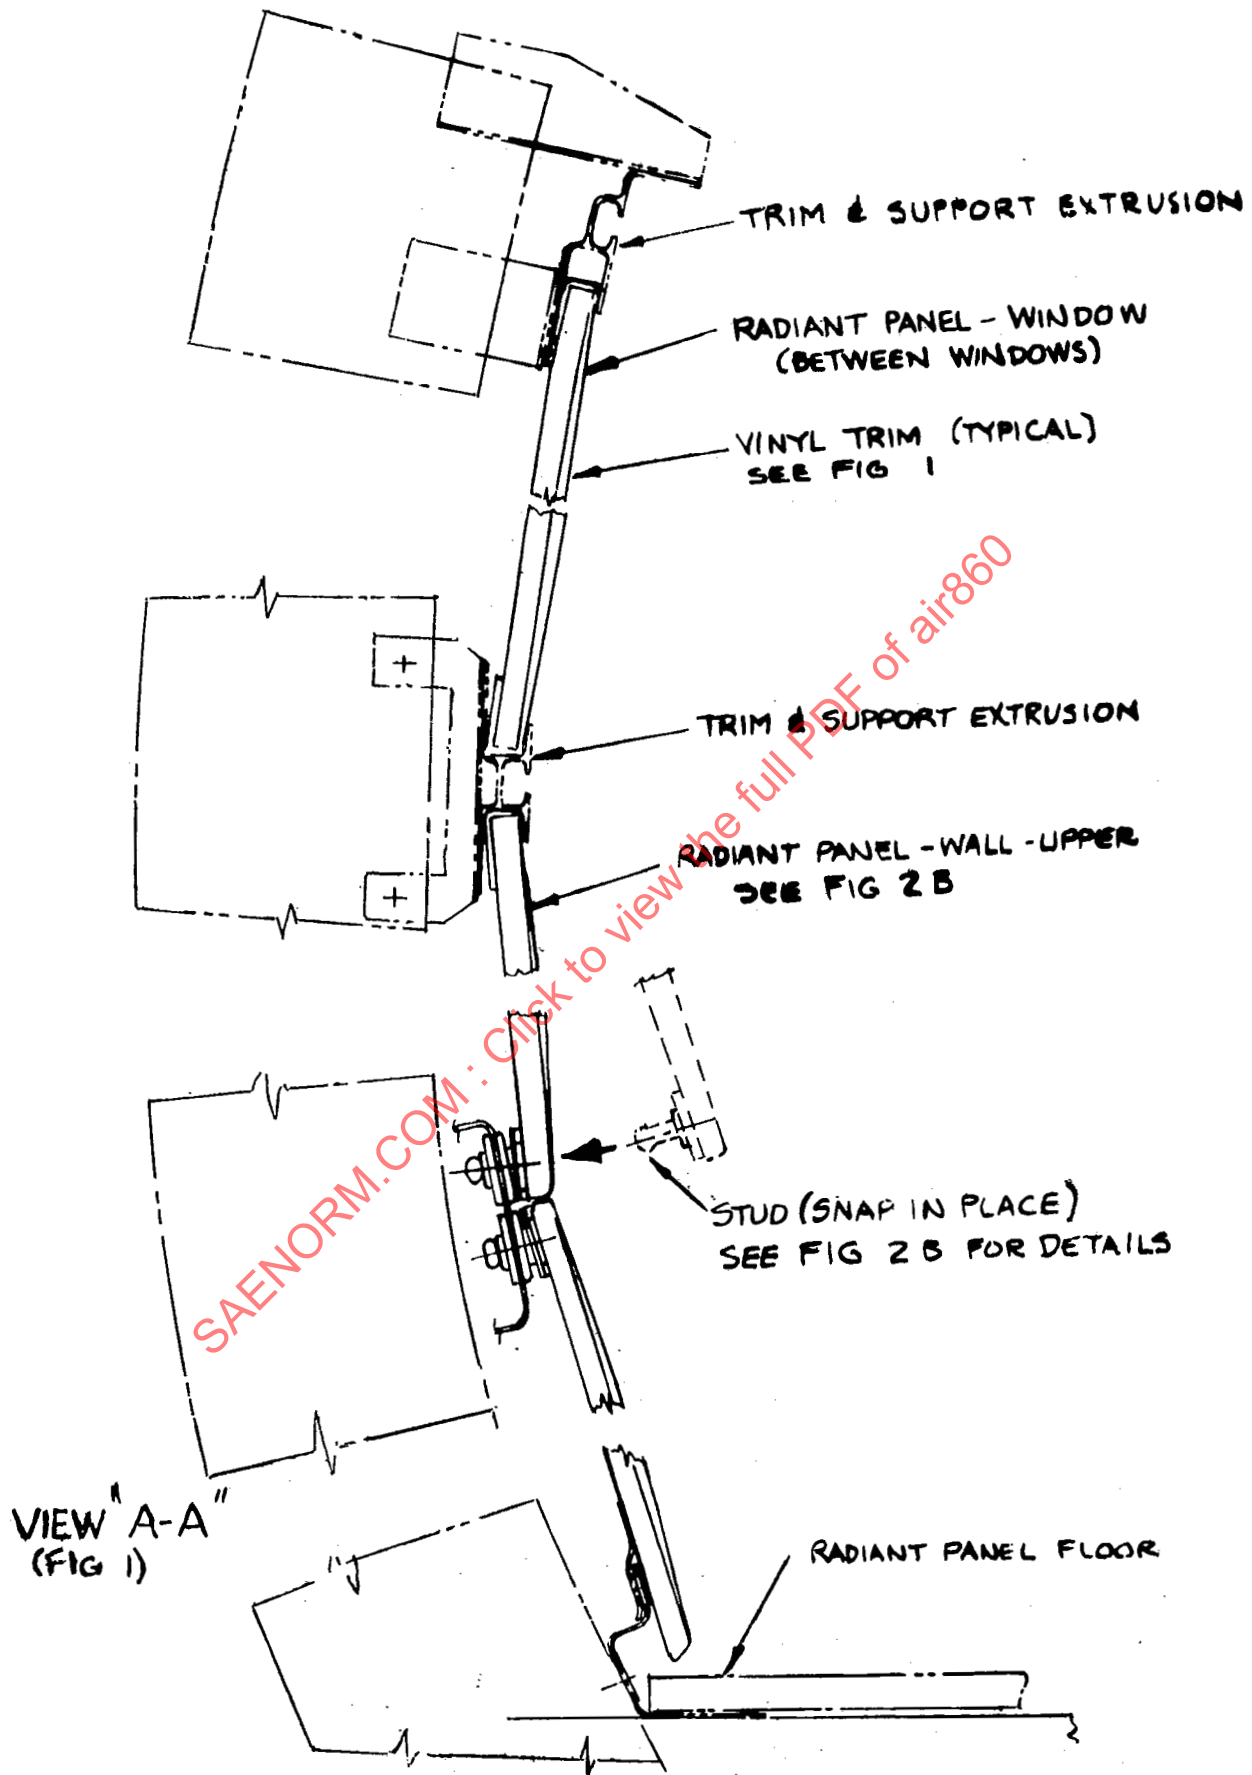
A. Cabin Wall and Floor Radiant Panels - Sect. View
